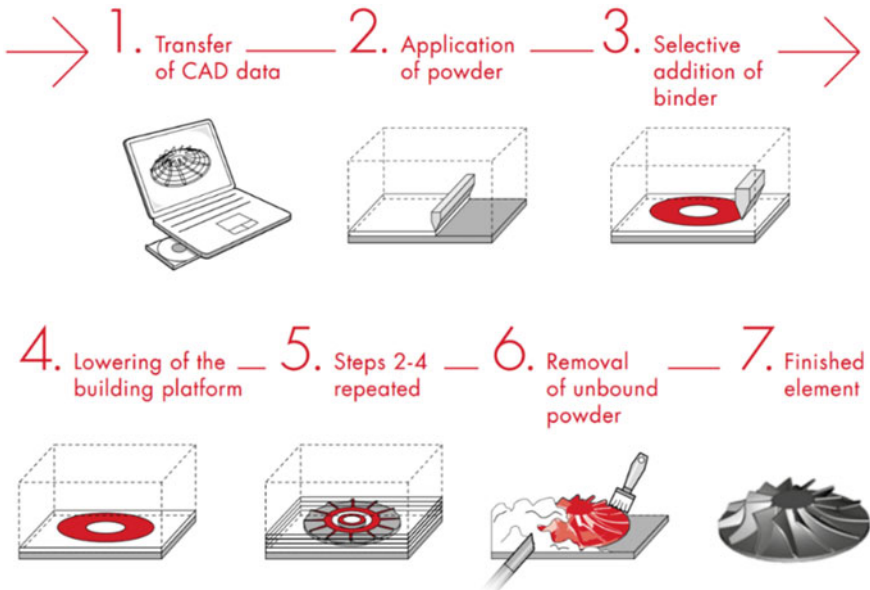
Fabrication of sand moulds from binder jetting (Image adapted from [17])
